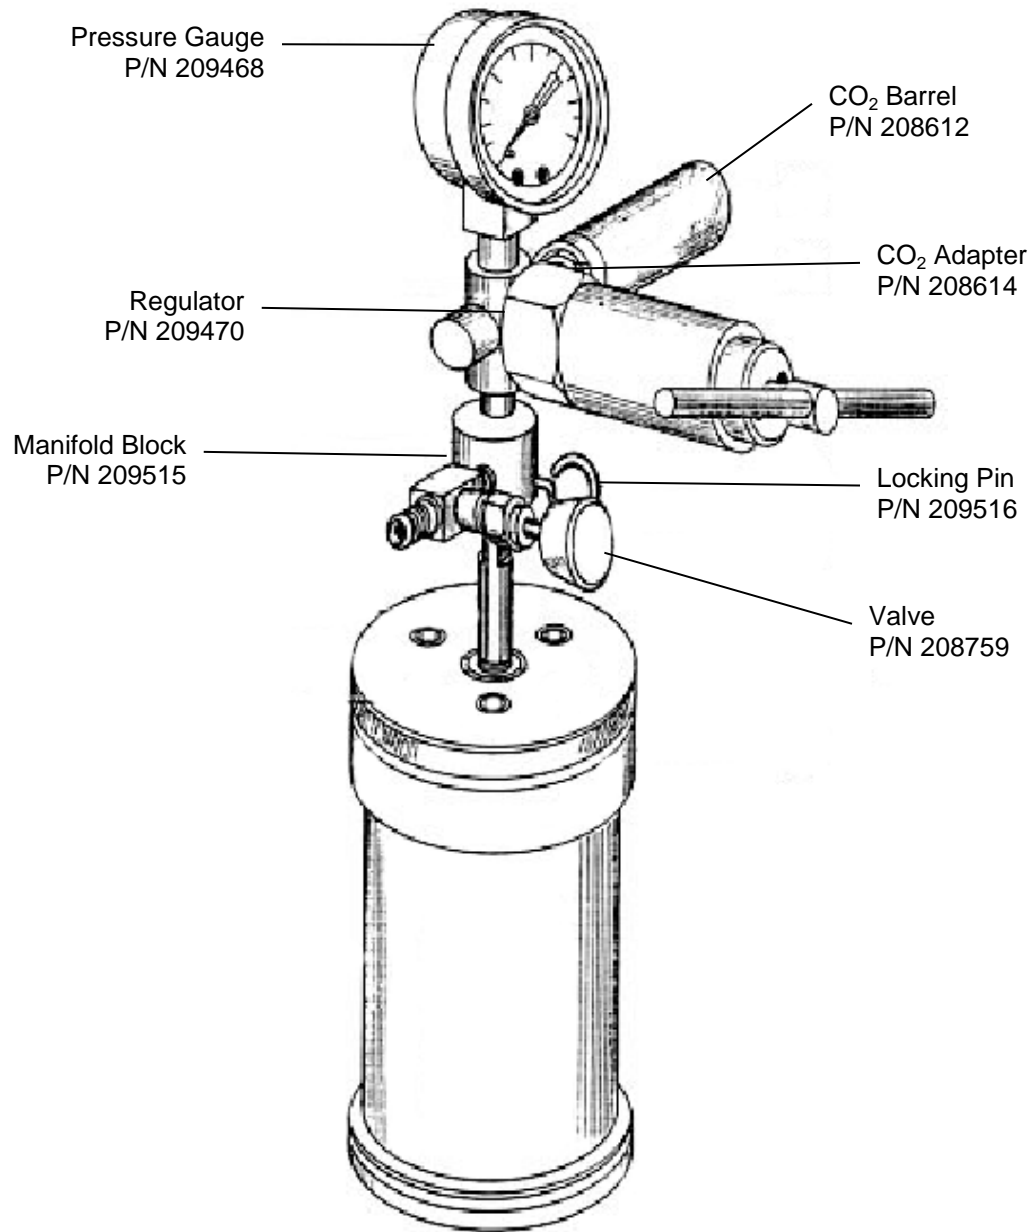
Carbon Dioxide Pressurizing Manifold
